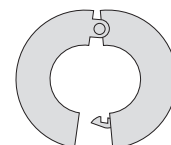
WITH SPRINGS & EXPOSED RIVET HINGE
